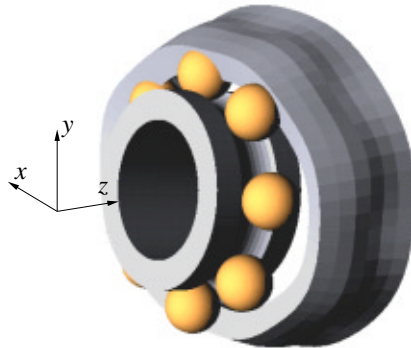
Static deformation field of an axially loaded ball bearing with geometrical imperfections mounted on the vibration test spindle.
